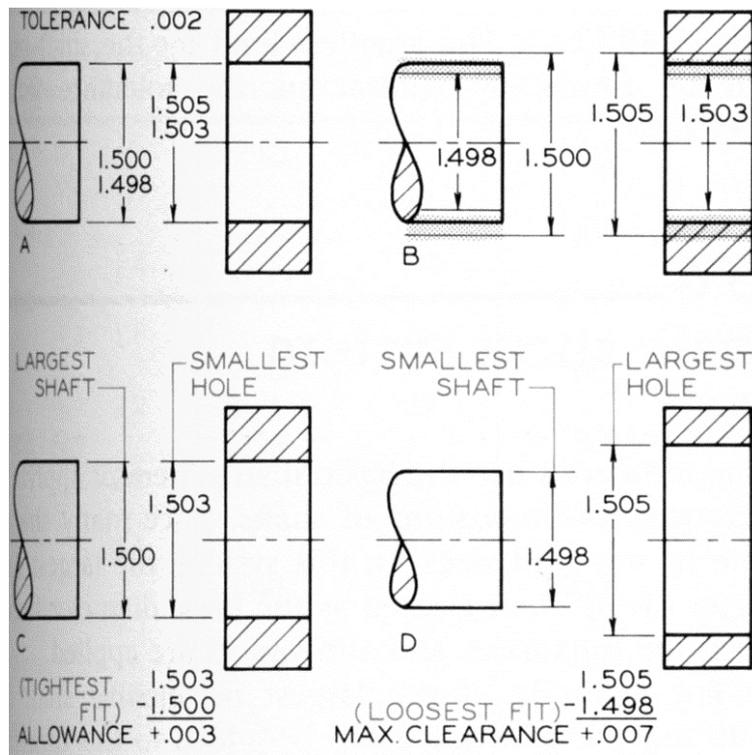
The allowance (tightest fit) between these assembled parts is +0.003". The maximum clearance is 0.007".
